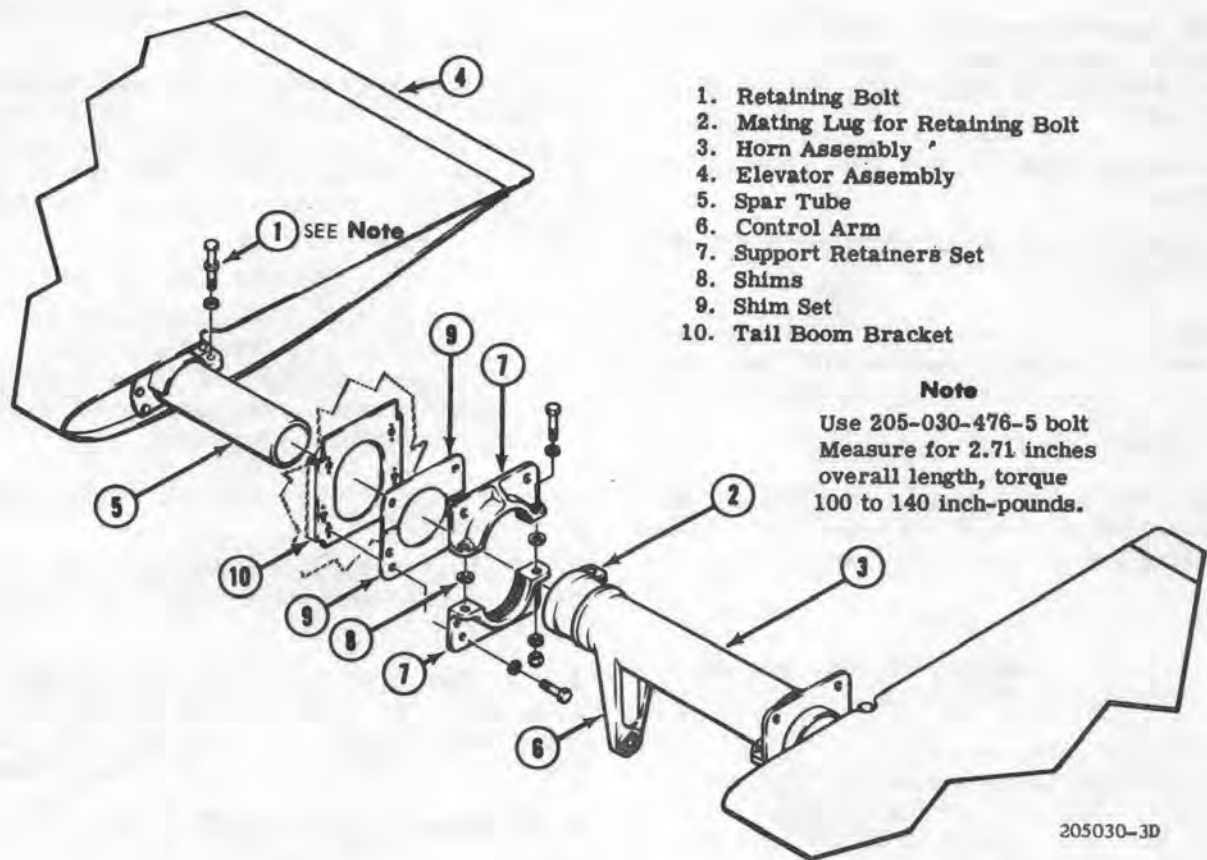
Synchronized elevator (UH-1B serial no. 64-14101 and subsequent)
